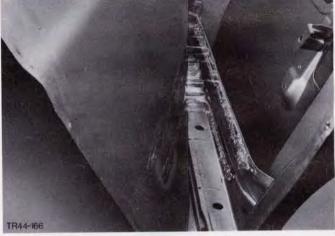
Heat outer door panel and remove from bonded connection to brace.
